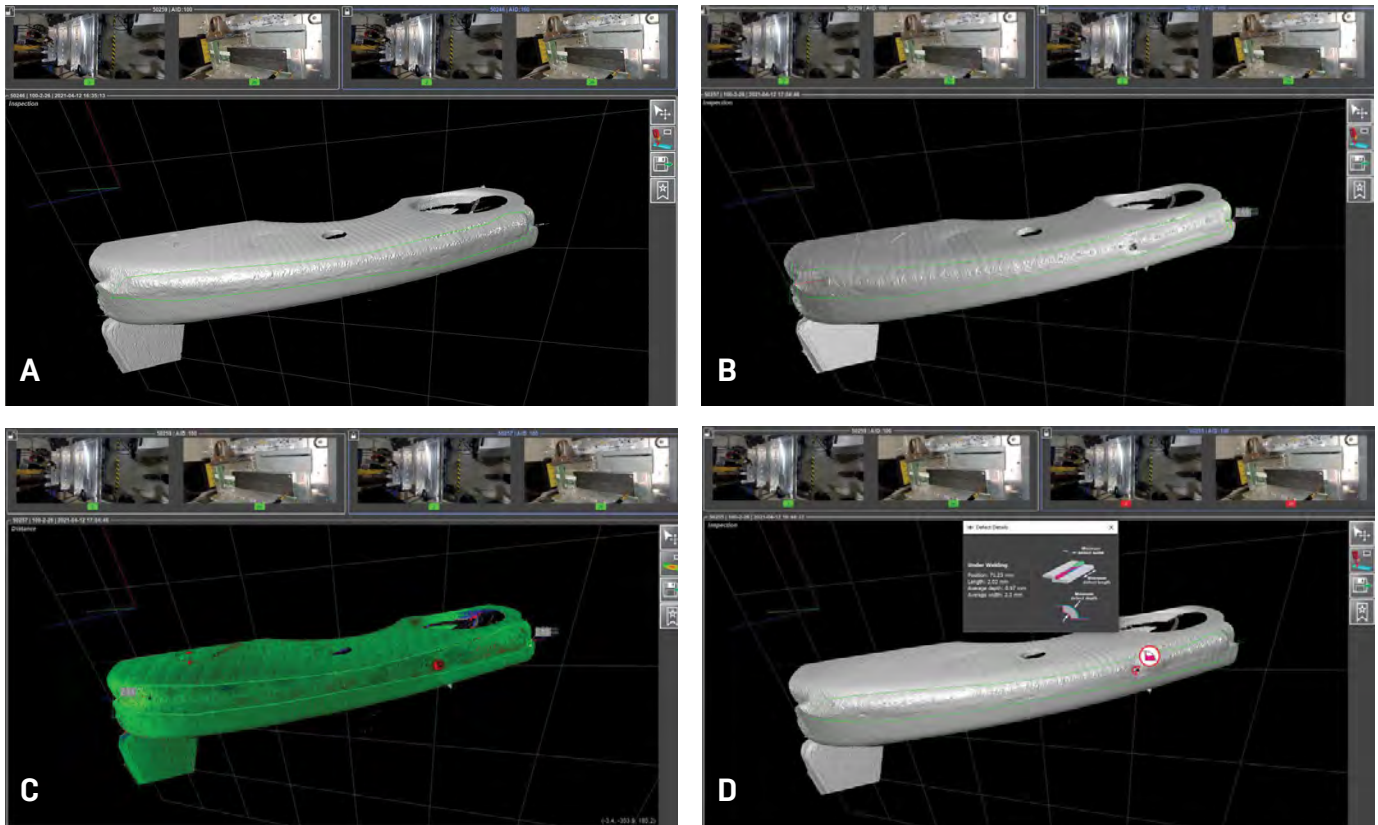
3D robot vision system inspects a weld to a reference. A — Golden reference part scan; B — current production scan; C — color map of the production part vs. the reference part, where green is okay and red is defective; D — detected defect.
